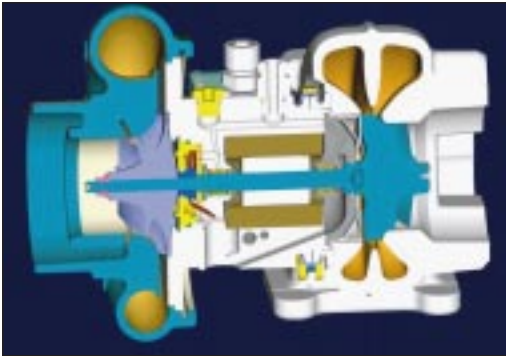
Turbocharger Integration – Mk1 Squirrel-Cage Machine
